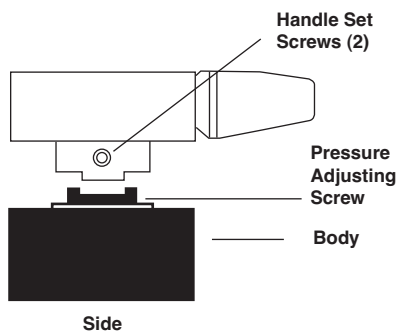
Valve handle acting as wrench to adjust valve pressure adjusting screw.
